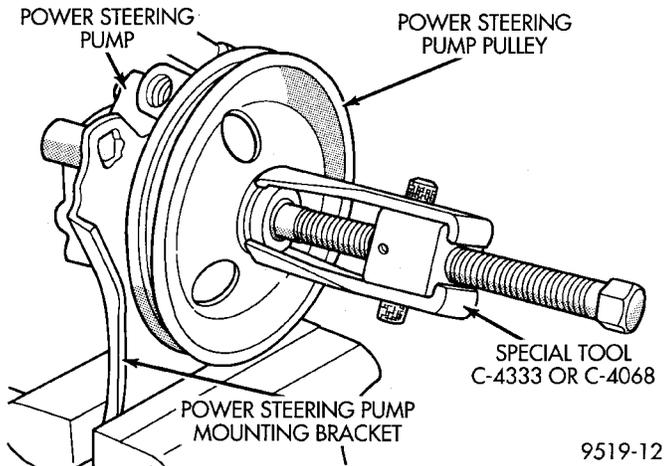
Pulley Removal From Power Steering Pump Shaft
